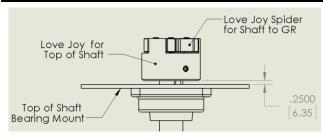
Love Joy Assembly connecting Center Shaft to Gear Reducer output
